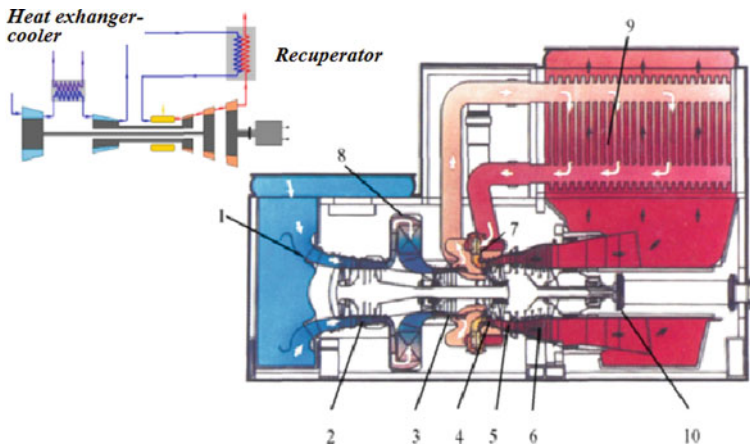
25 MW WR-21 engine from “Rolls-Royce plc”. 1—inlet casing; 2—7-stage LPC; 3—6-stage HPC; 4 and 5—single-stage HPT and LPT; 6—5-stage power turbine; 7—combustion chamber; 8—air cooler; 9—recuperator; 10—output shaft
